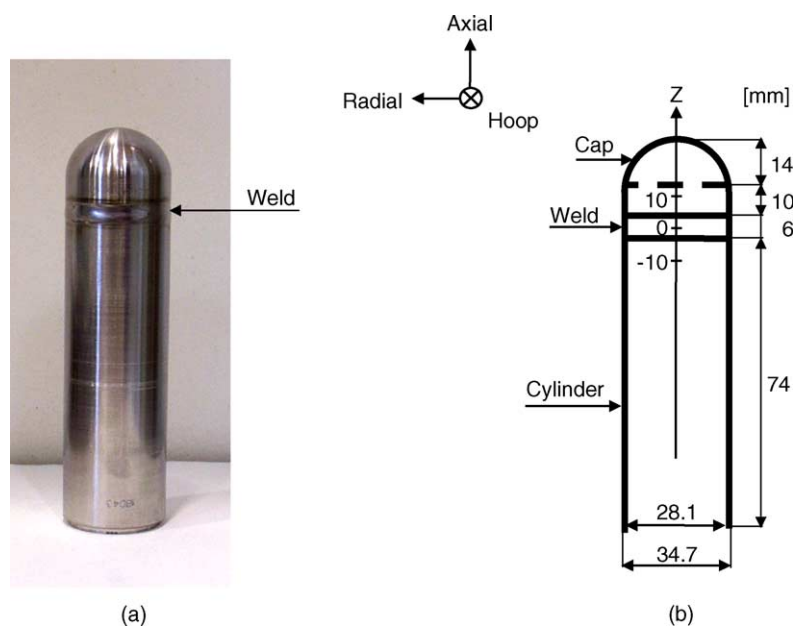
(a) The welded Haynes[®] 25 sample. (b) Dimensions of the welded sample, including the z-axis.
